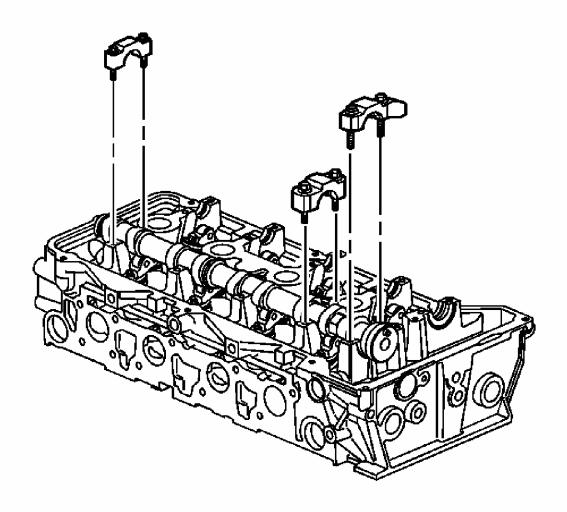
View of Right Exhaust Camshaft Bearing Caps Courtesy of GENERAL MOTORS CORP.
